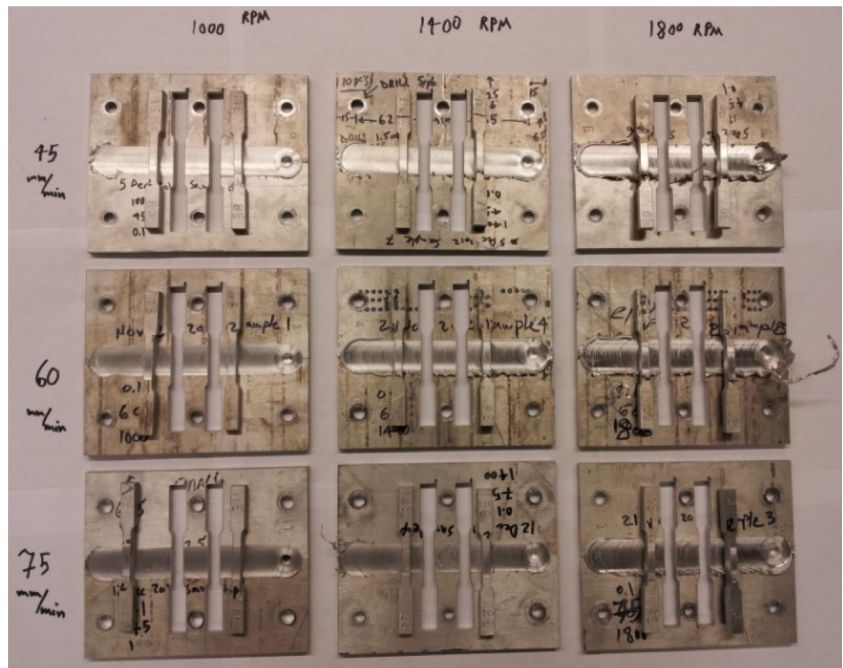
Tensile samples cut from FSW samples with different controlled process parameters (weld speed and tool RPM)
